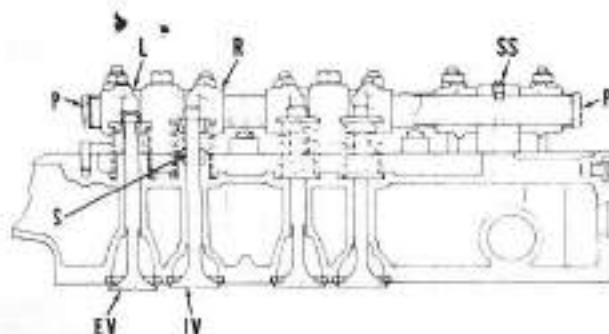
Cut-away view showing rocker arm and valve installation in three-cylinder engine; four-cylinder engines are of basically similar construction.
